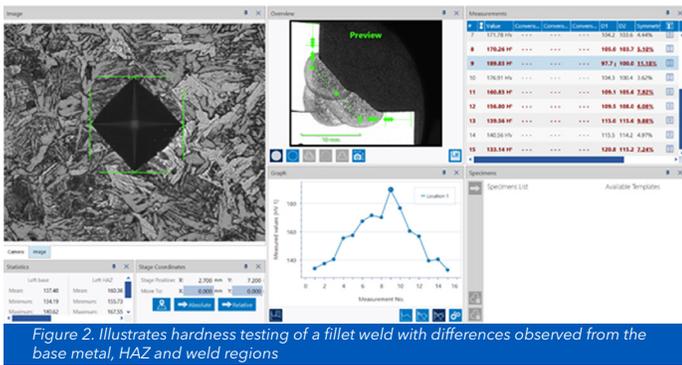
Illustrates hardness testing of a fillet weld with differences observed from the base metal, HAZ and weld regions
